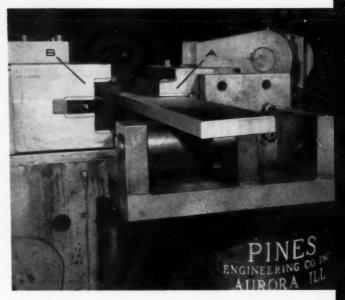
Steel plate, 1 1/4 inches thick and 5 1/2 inches wide, is placed on a bending machine. Form die (A) and clamp die (B) will securely lock the work at the beginning of the bending cycle.
